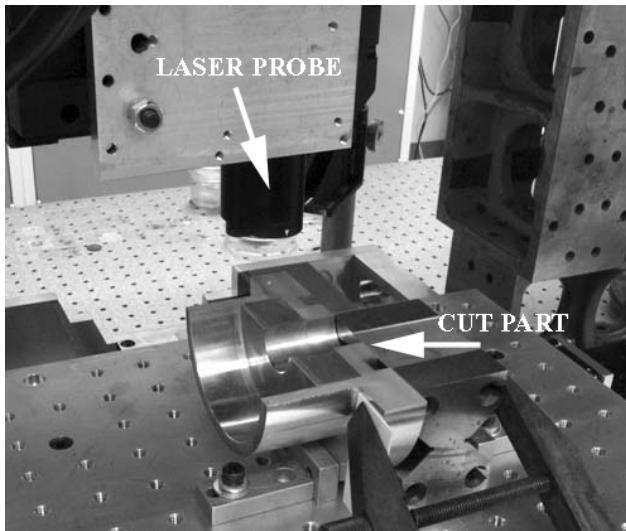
Photograph of upper joint prototype test part cut in half with wire EDM.
